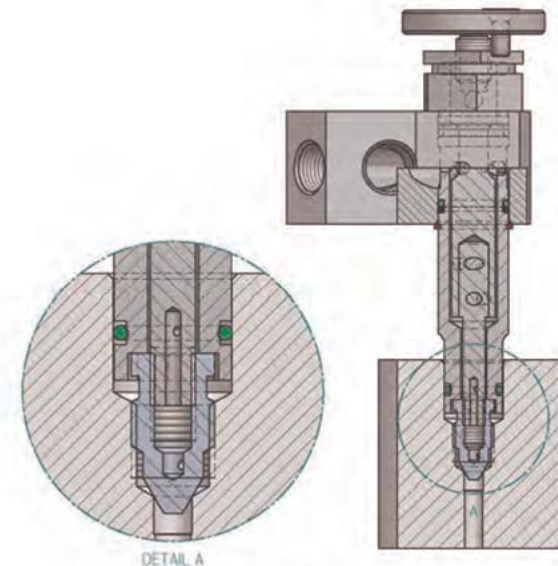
TYPICAL FILL AND CHARGE PLUG LOCATIONS
